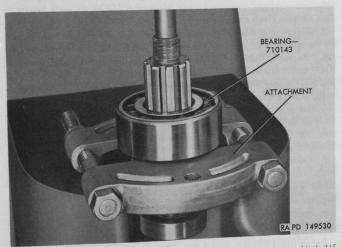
Removal of drive pinion outer bearing with attachment 41-A-345-328 (part of puller set 41-P-2905-60).
